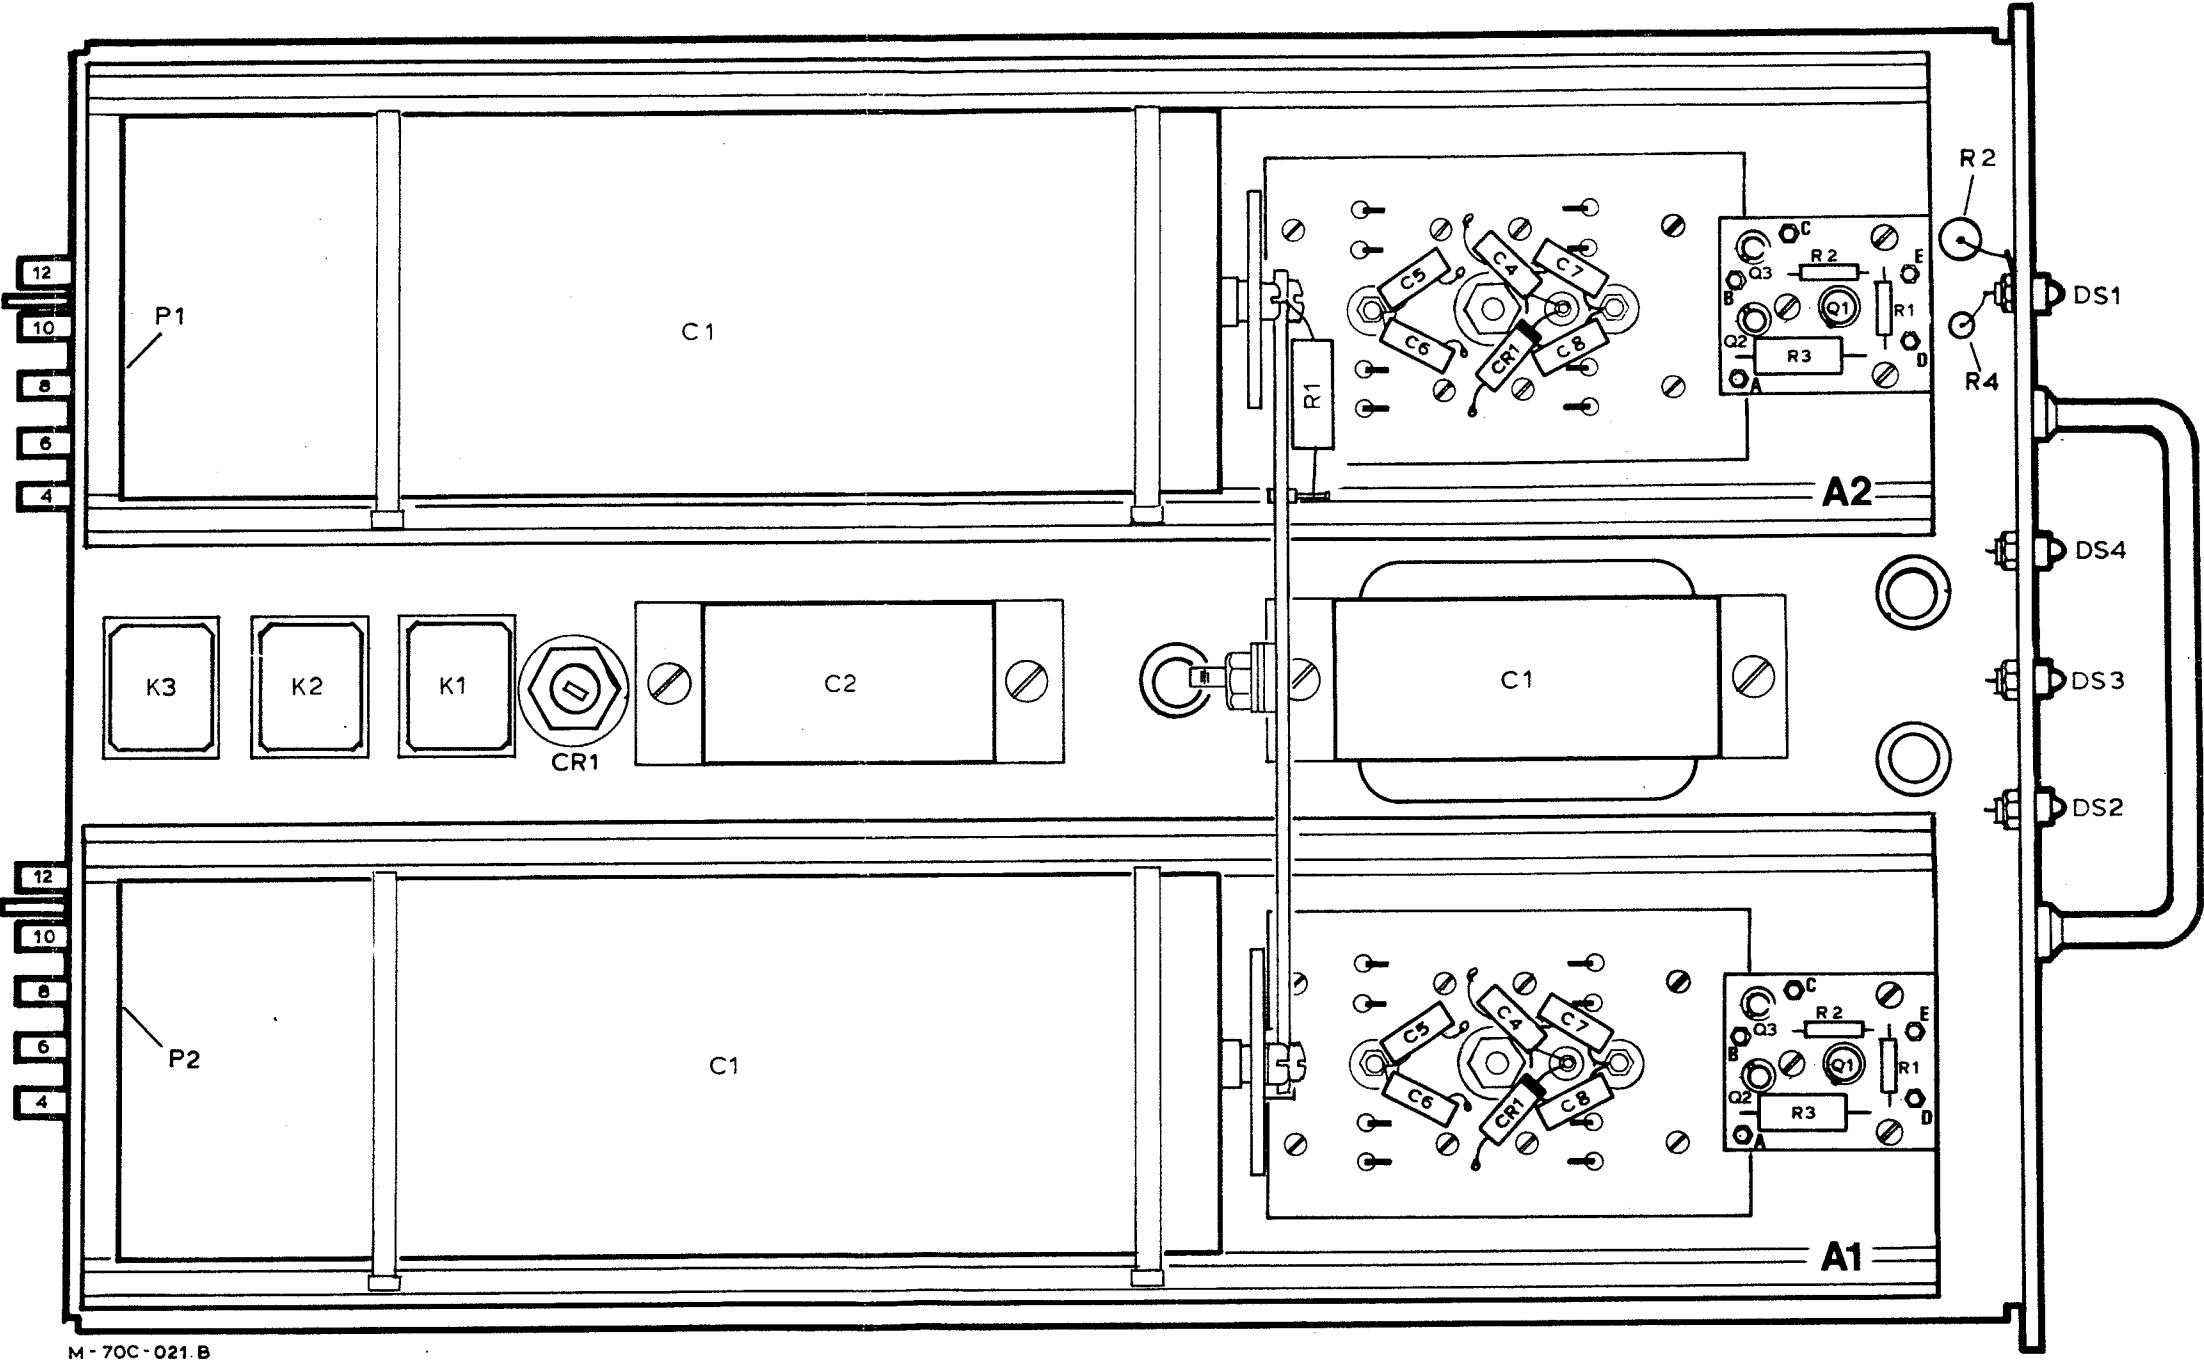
Assembly Detail - NASM1A Modulator Module, Top View
